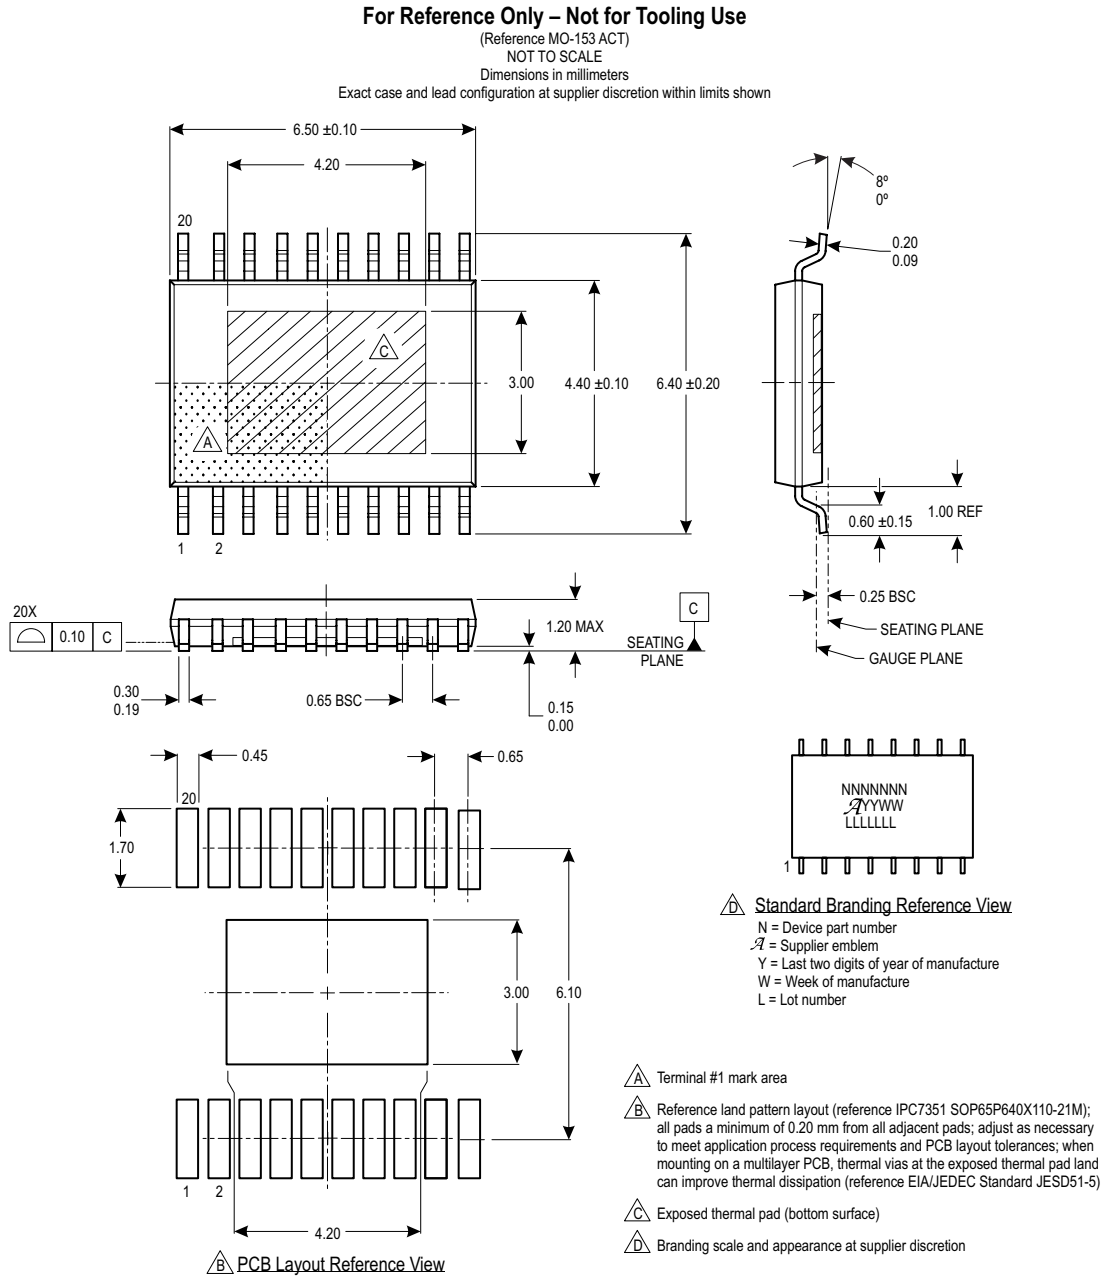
Package LP, 20-Lead TSSOP with Exposed Pad
